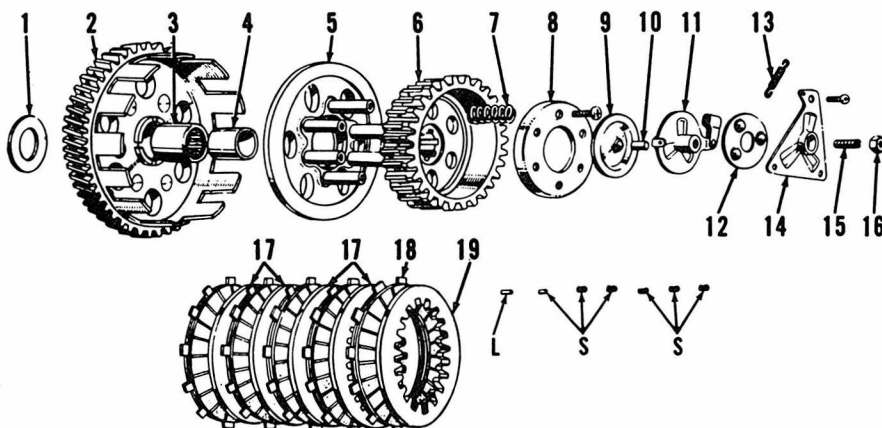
Exploded view of clutch assembly. The clutch adjusting screw (15) is also shown in Fig. K3-14.
